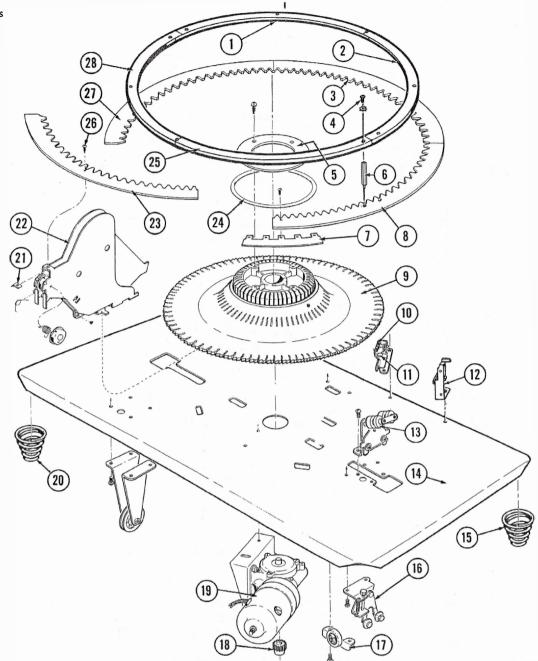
CHASSIS MOUNTING PLATE AND RECORD CARRIER GROUP, 2400-2400S
